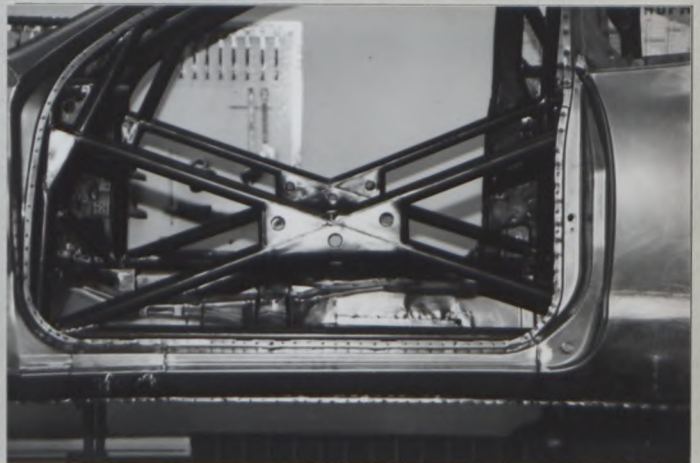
(MAIN AND REAR CROSS SECTIONS)
